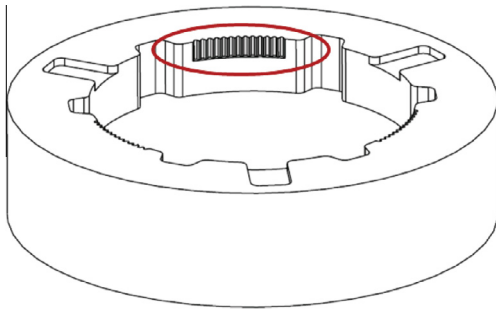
TR73 sheet bulk-metal forming demonstrational tool [3].
